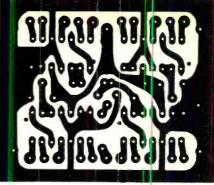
Actual size etching guides for Time Base and Scaler printed circuit boards are shown at left and above, respectively. Use etching guides to check for solder bridges between closely spaced conductors after all components are soldered to circuit boards.
